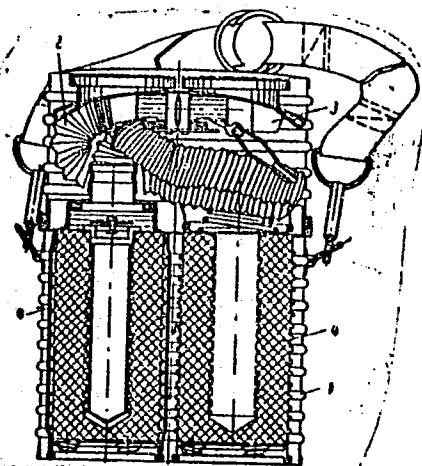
1- breathing box; 2- corrugated hose; 3- mouthpiece;
